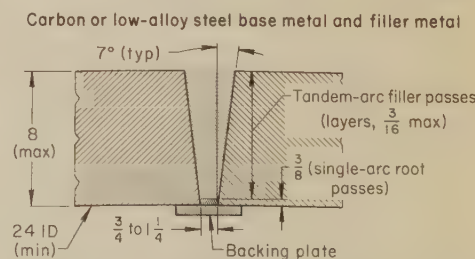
shows the design of a single-V-groove longitudinal butt joint used in submerged-arc welding of thick-wall pressure vessels made of carbon or low-alloy steel. The minimum inside diameter of these vessels was 24 in., and the wall or plate thickness did not exceed 8 in.—an upper limit imposed by the need to accommodate the welding head in the joint.
